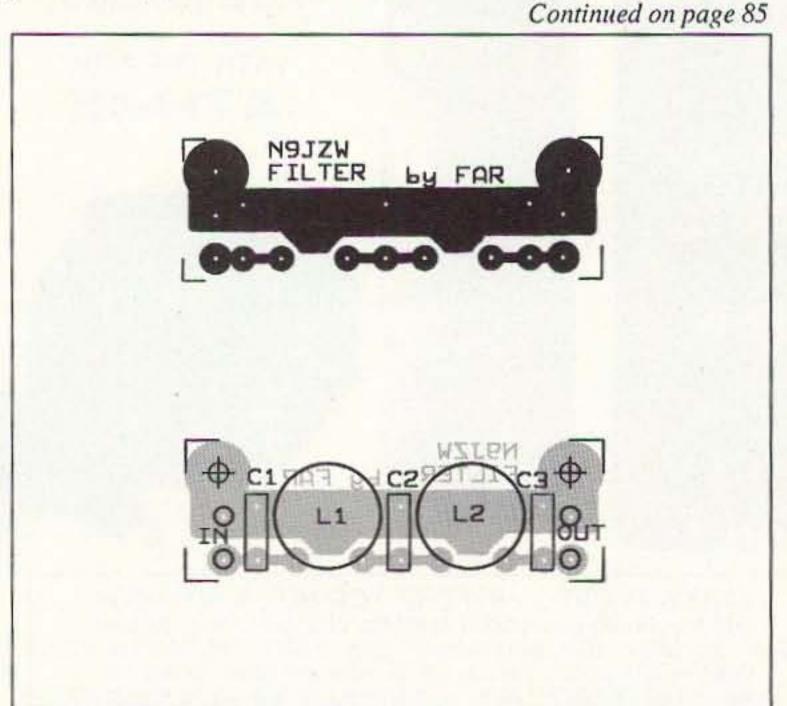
(a). PC board foil pattern of the output filter board. (b). Parts placement.
